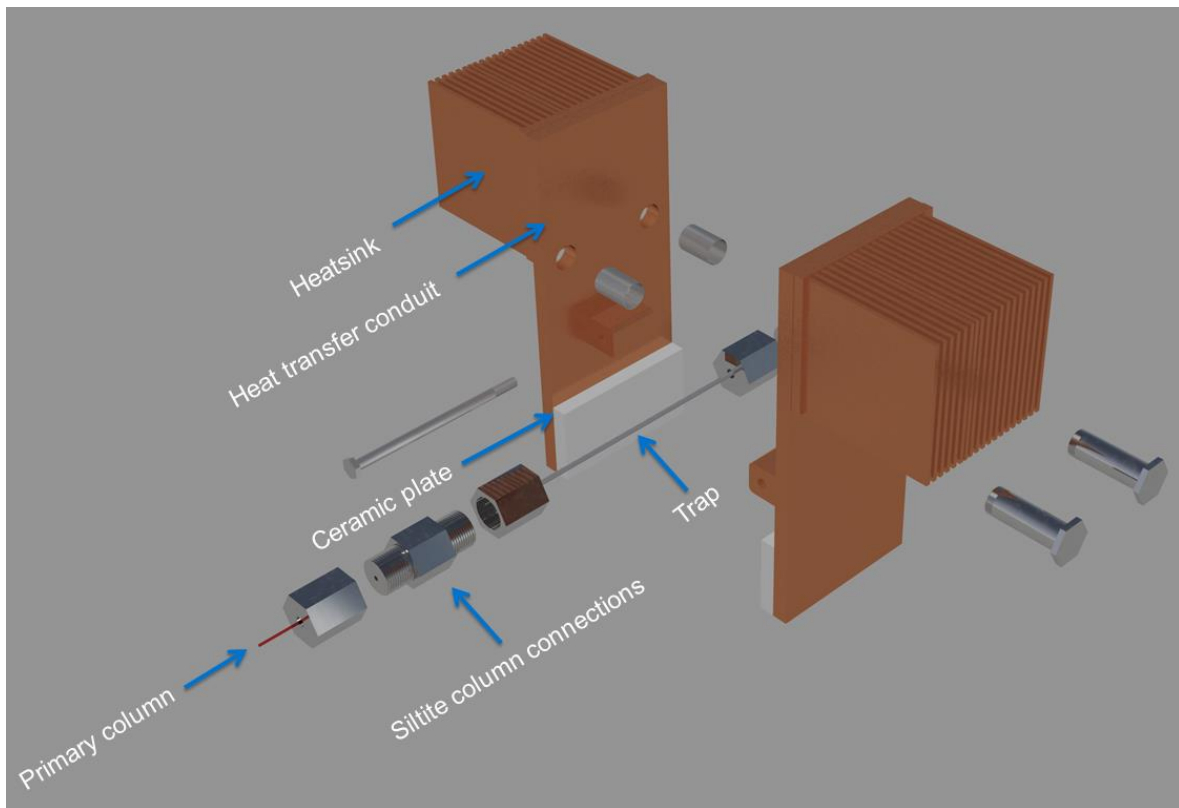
Rendering of the Mk IV modulator design showing where the Macor pads were located relative to the heat sinks.
